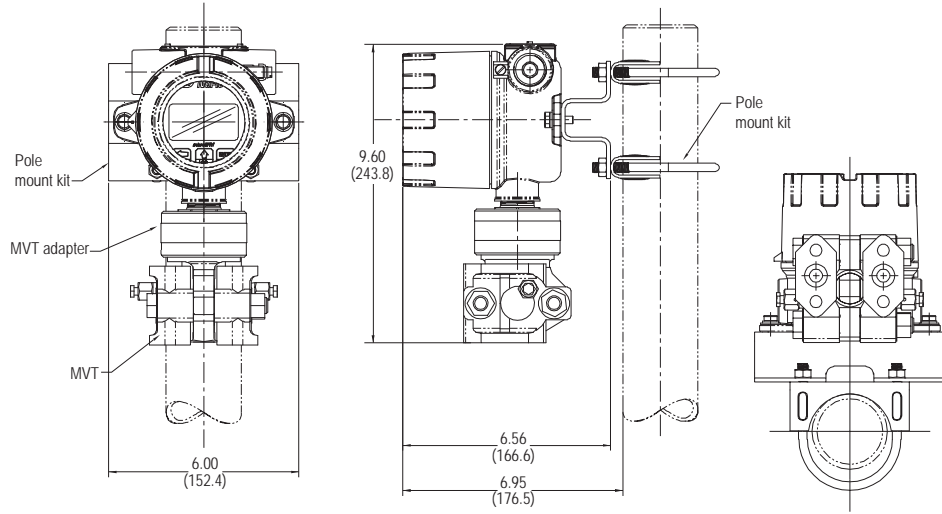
MVT with a standard bottom-port multi variable transducer and manifold on a 2-in. pole
